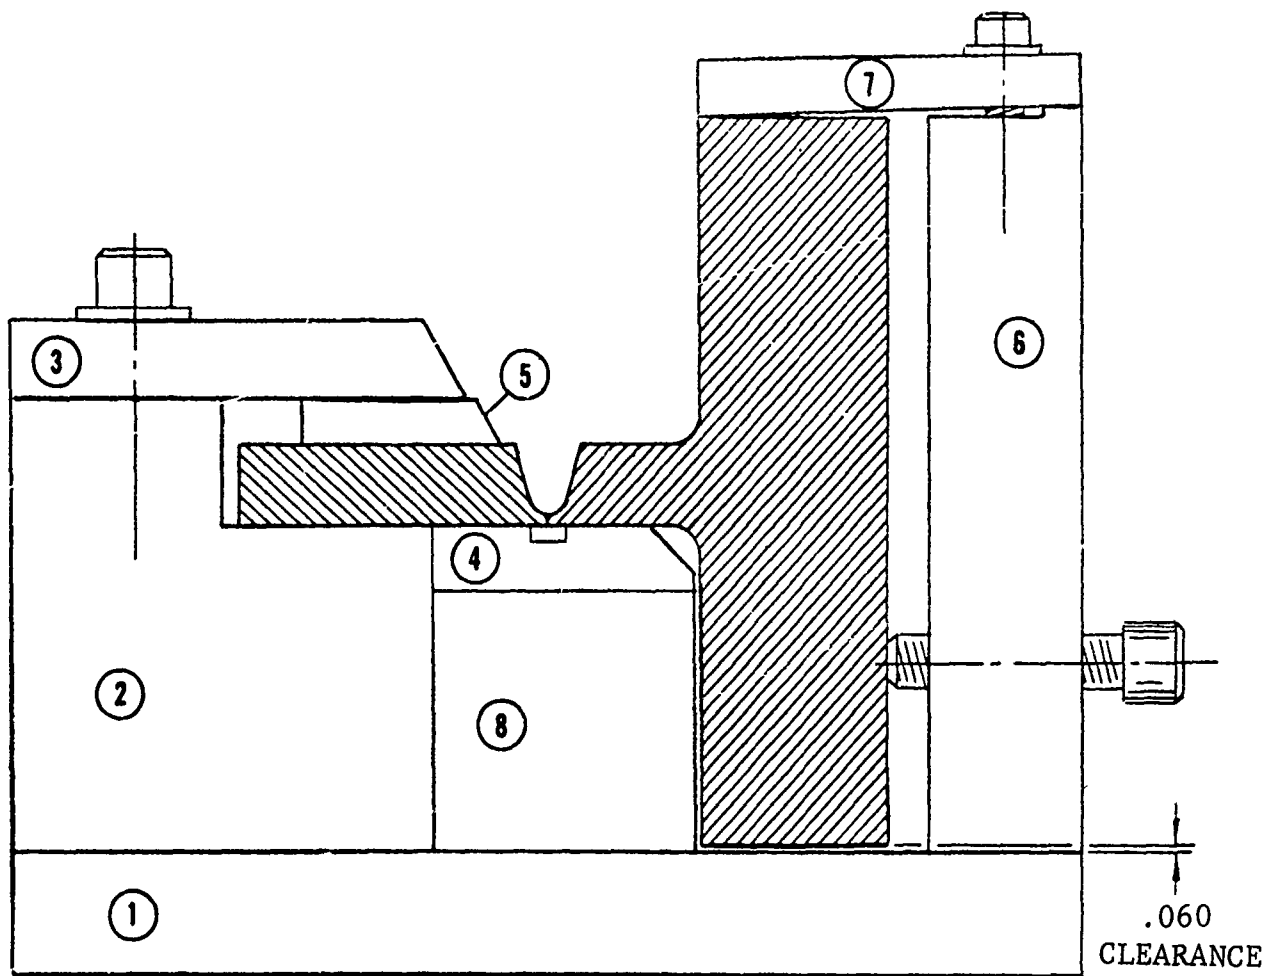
COMBINATION GTA AND EB WELD FIXTURE FOR WELDING BULKHEAD TEST SPECIMENS
